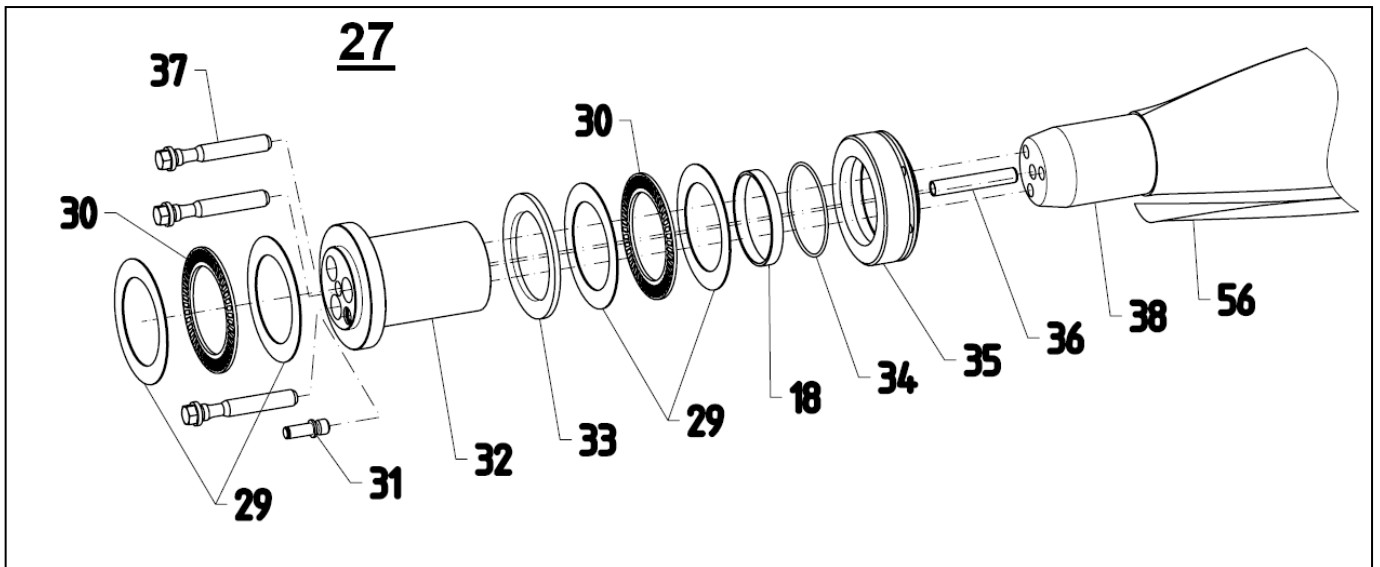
Propeller Assembly Part 4 - blade C, W before change Z-KW-3(x)-03.
